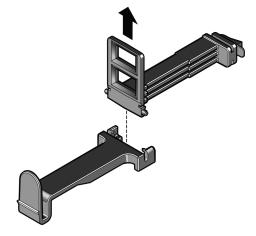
Removing the Swing Arm from the Bottom Cable Management Clip
